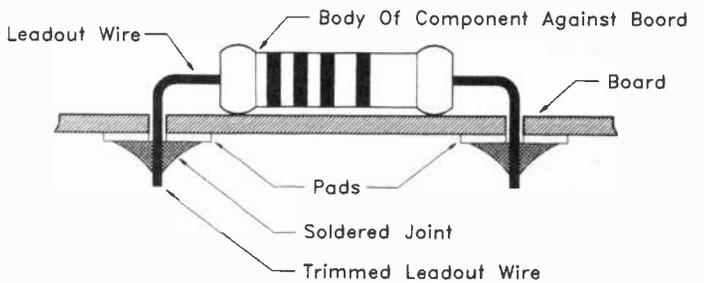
Mount components with their bodies flat against the board. The solder should flow nicely over the pad and leadout wire as shown. If the component leads are bent slightly (in line with the copper track) they will hold the component in place but should not prevent later removal.
